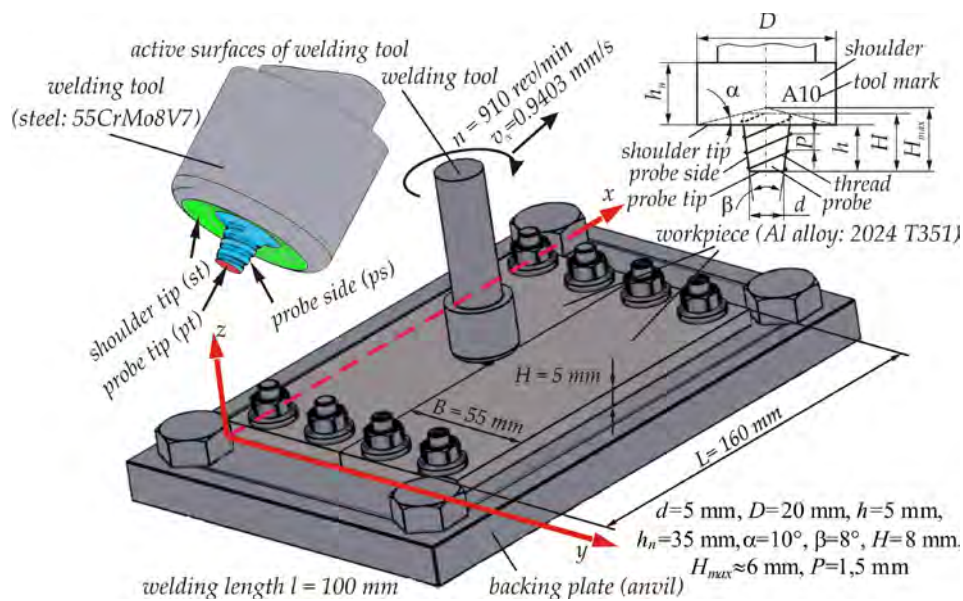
Principle of the FSW, welding tool and active surfaces of the welding tool
